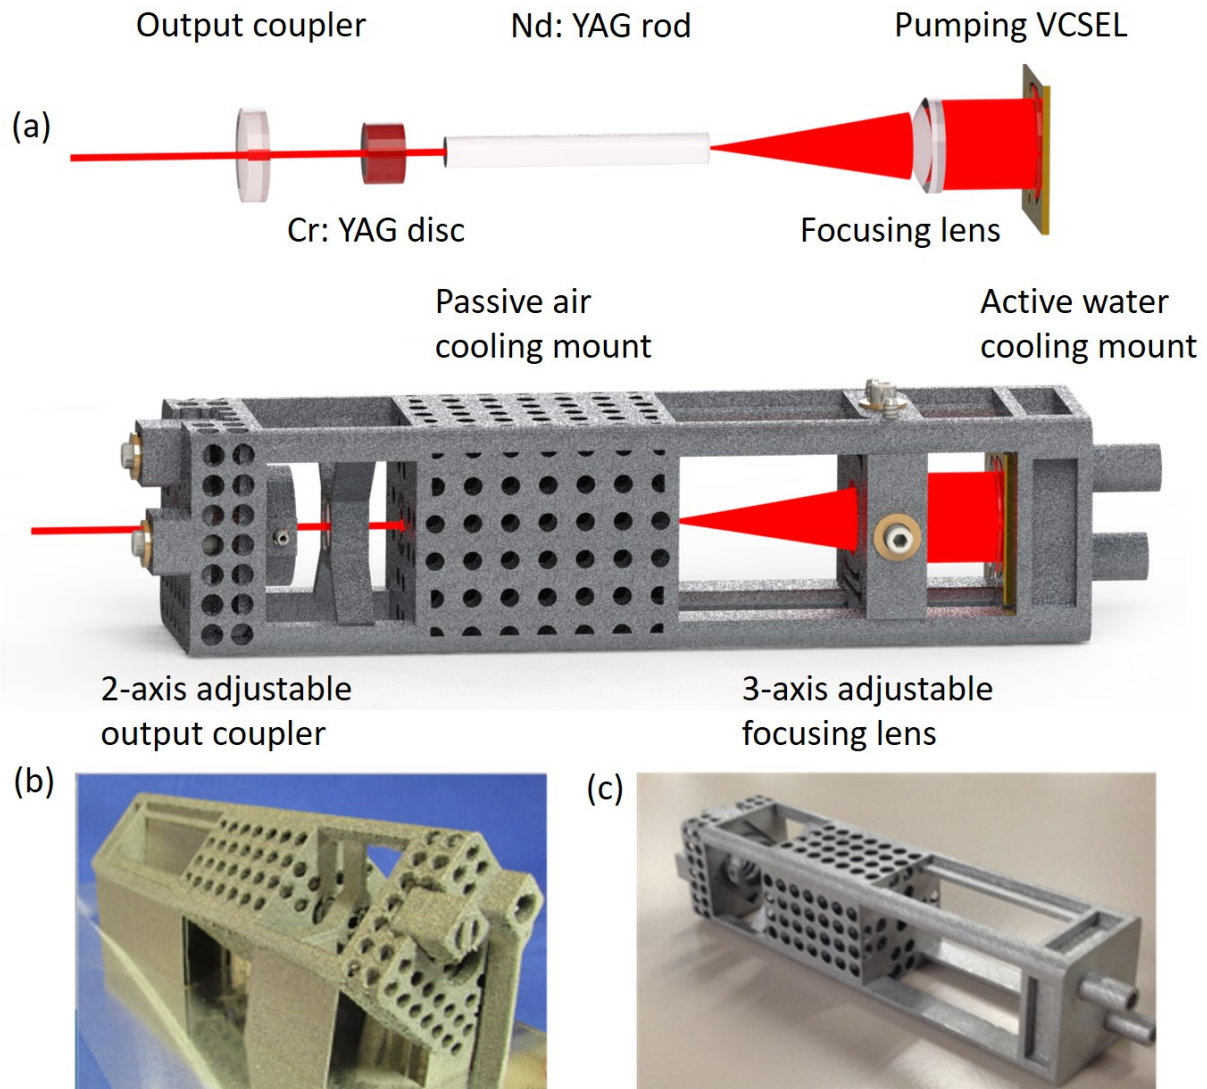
Schematic and photos of the 3D printed laser. a, Schematic of passive Q-switched laser cavity design and 3D printed laser frame with all the optical parts integrated into the frame. b, 3D printed laser frame with all the supporting structure. c, 3D printed laser frame with all the supporting structure.
